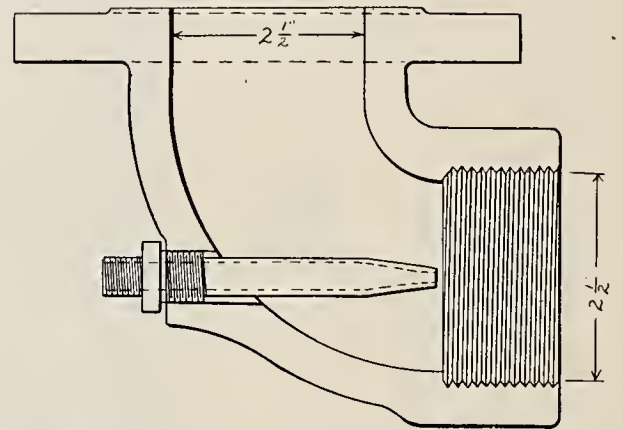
CHICAGO GREAT WESTERN TANK, BOTTOM CASTING AND PRIMER.
